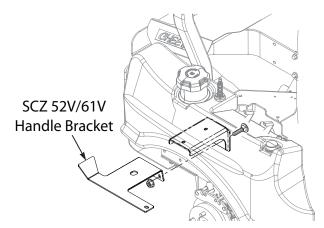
SCZ-61V OCDC Handle Bracket Install
